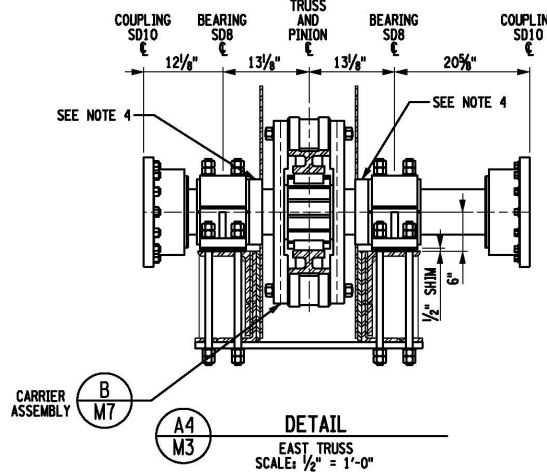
Rack Pinion Frame Carrier Assembly. View through Truss.
